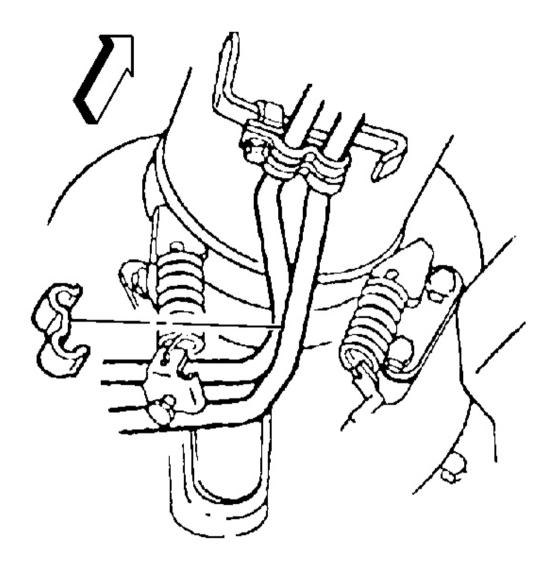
TOC Rear Pipe & Rear Clip Courtesy of GENERAL MOTORS CORP.
